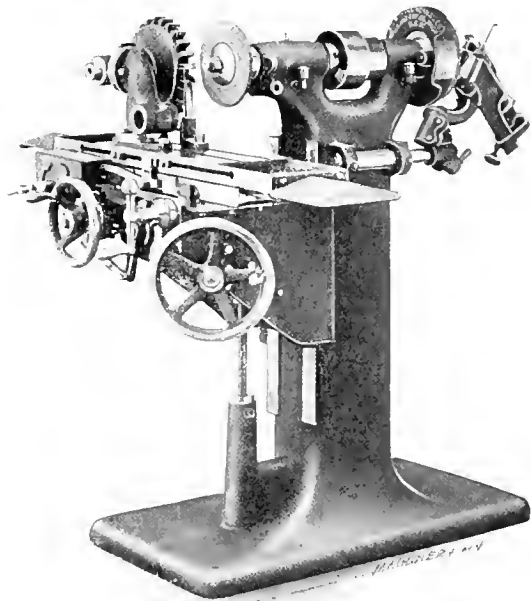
Cutter Grinding Attachment in Use on Table of Surface Grinder. Note Drill Grinding Attachment on Rear of Column.
